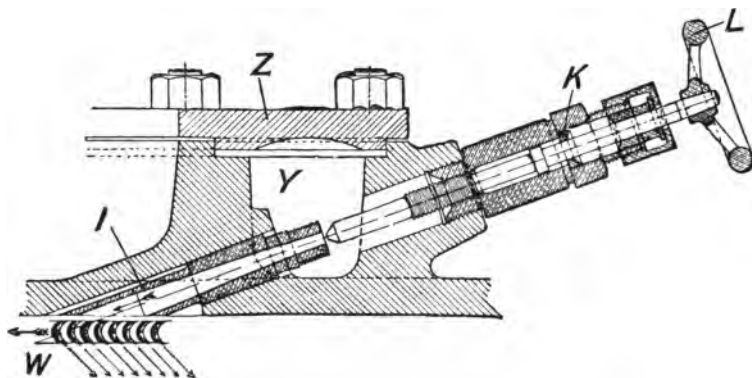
Nozzle and Vanes of a De Laval Turbine.
